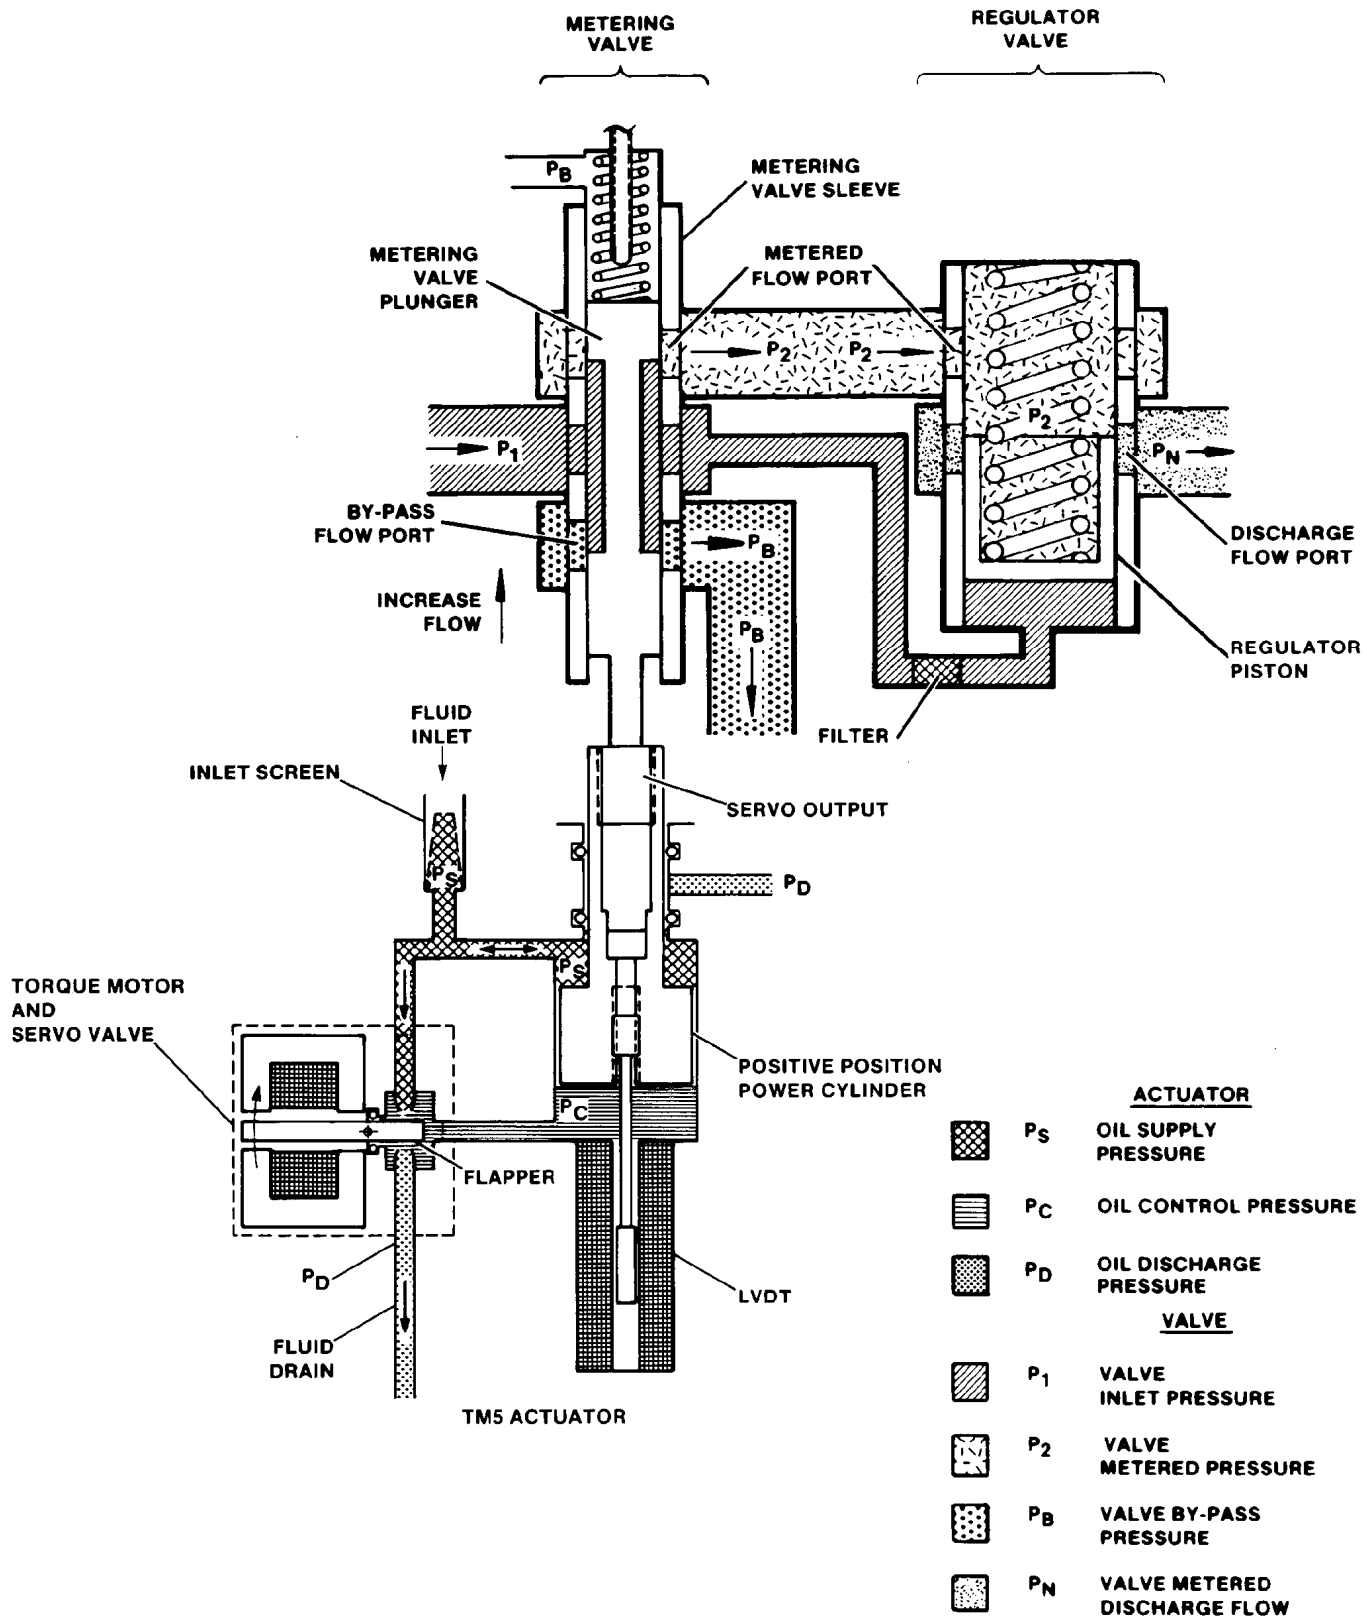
Schematic Drawing, 3151A Water Valve/TM-5L Integrating Actuator Assembly
